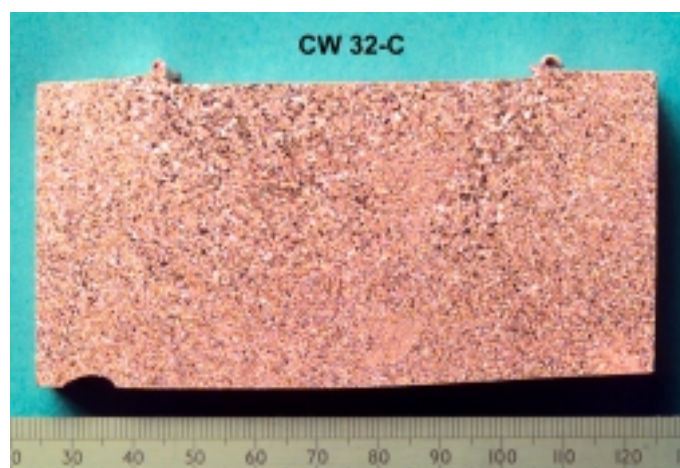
A transverse metallurgical section through a 50mm thick copper stir weld.
